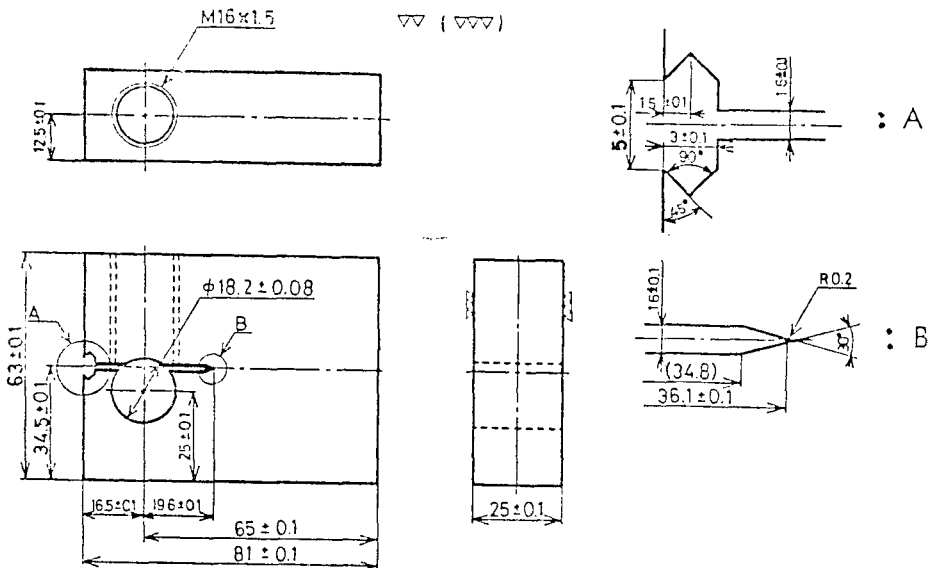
Configuration of the specimen for stress corrosion cracking test.
